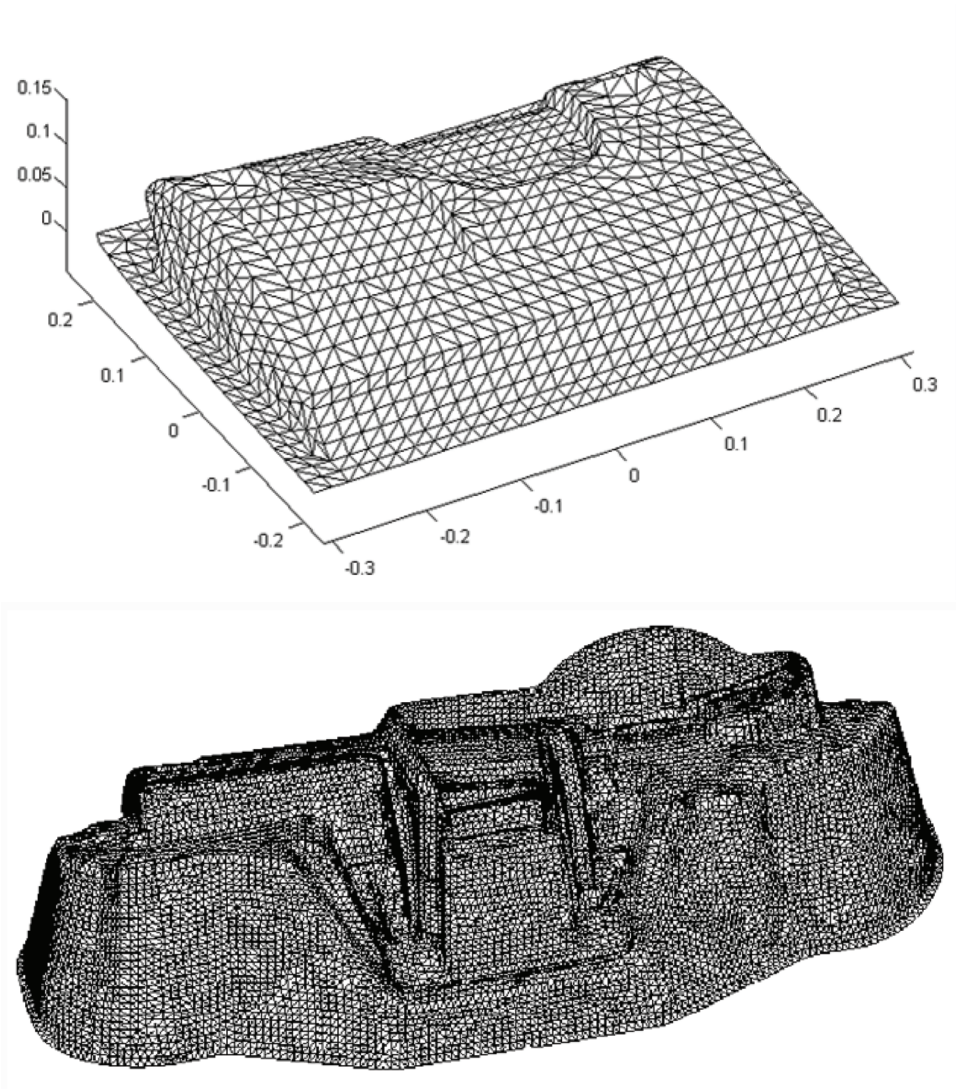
Examples of shell moulds used in the Slush Moulding Technology
